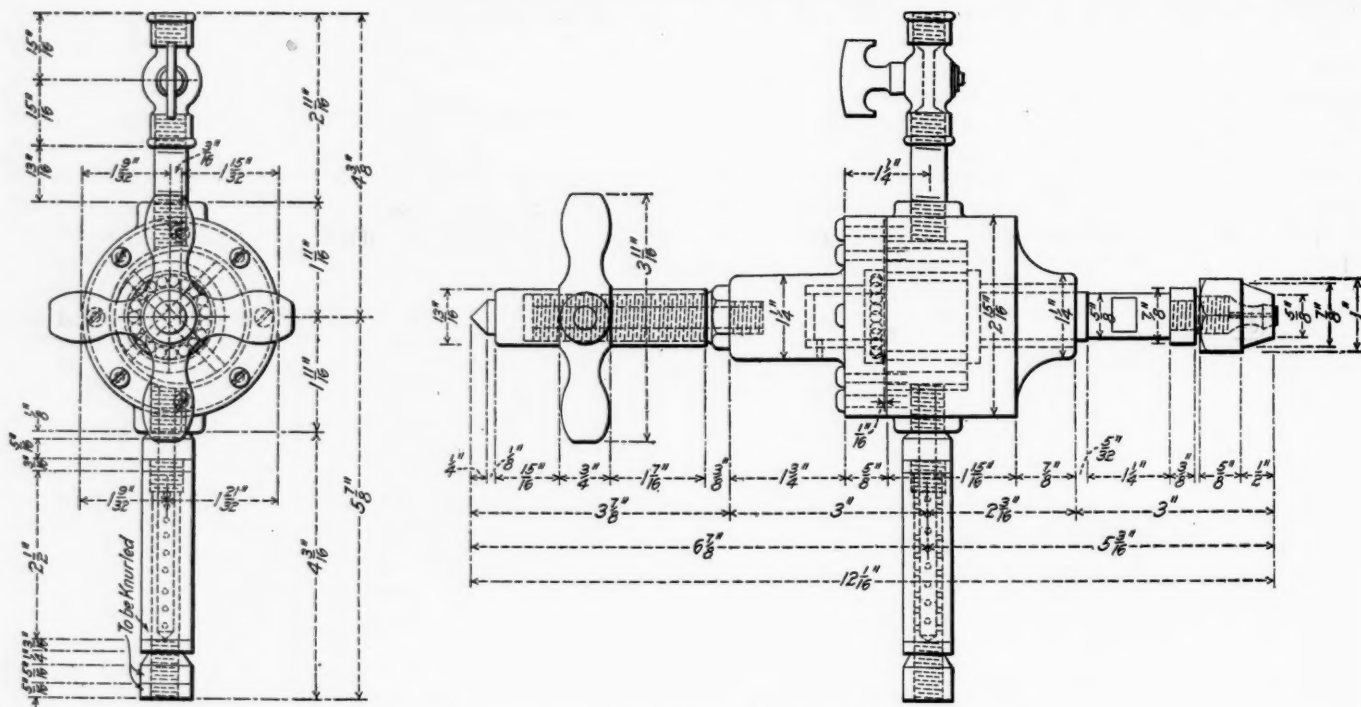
Rotary Air Motor for Drilling Staybolt Tell-Tale Holes.
